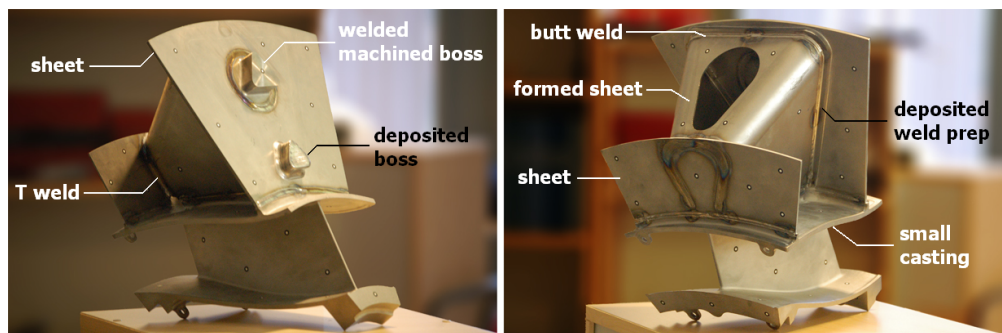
Fabricated segment consisting of sheet metal, a small casting, a machined and a deposited boss.
